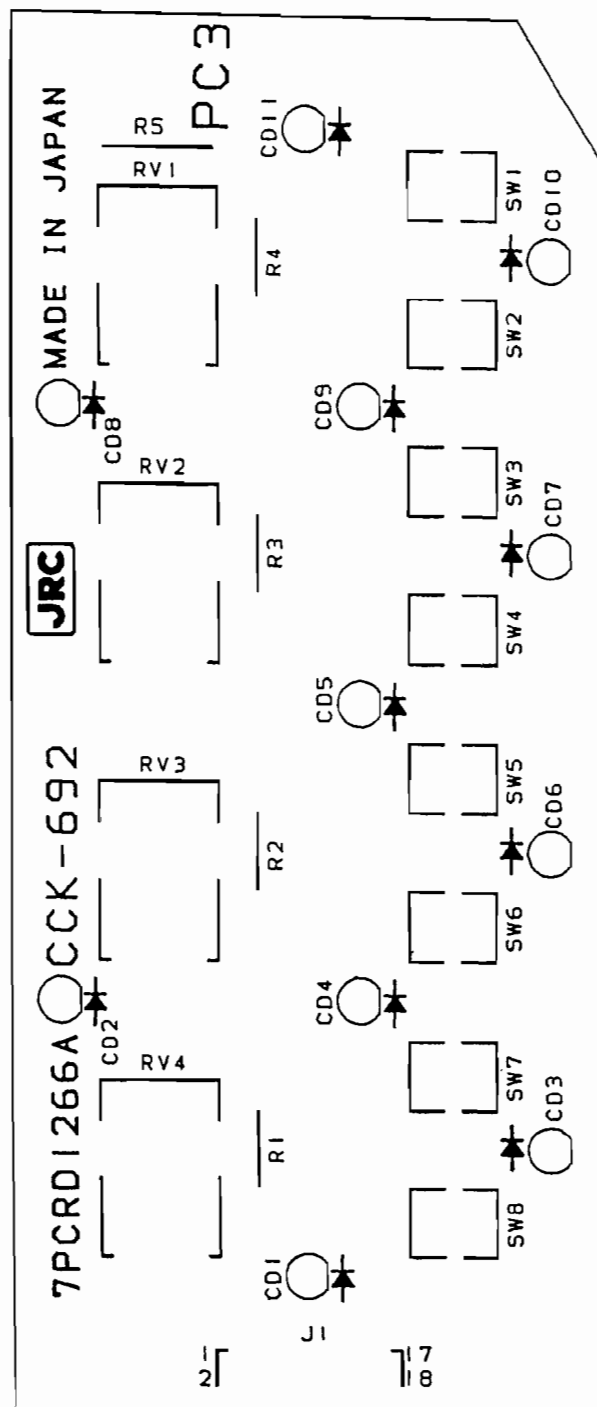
COMPONENT LOCATION DRAWING, BEZEL CONTROL PCB [right] (CCK-692)
